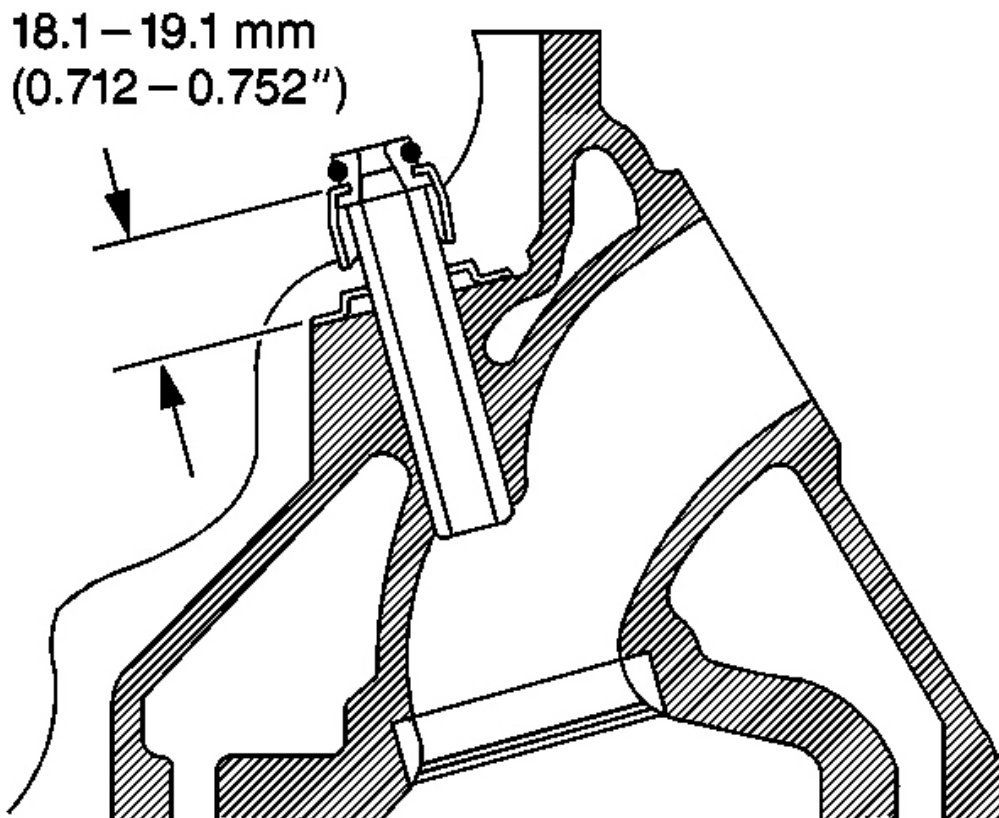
Measuring Valve Stem Oil Seal For Properly Installed Height
